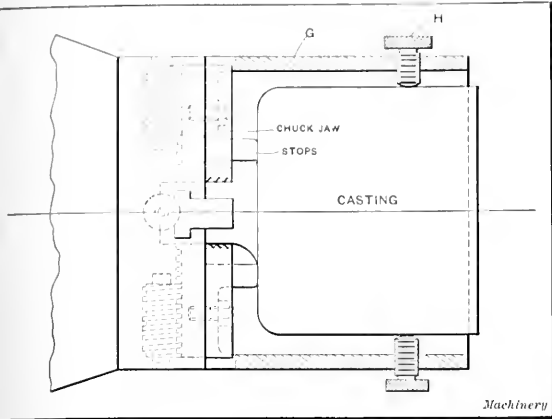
Detail of the Chuck and Method of holding Fan Motor Bodies in the Two-spindle Jones & Lamson Flat Turret Lathe
